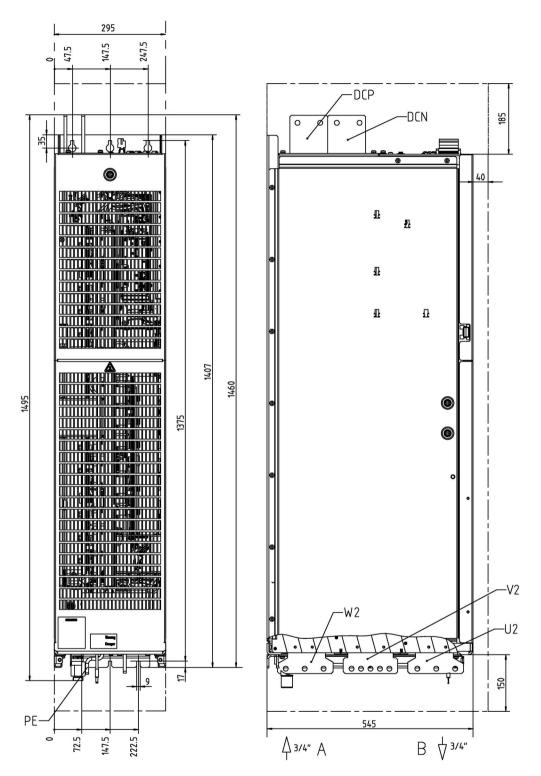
Dimension drawing Motor Module, frame size JXL, article numbers 6SL3325-1TE41-4AS3, 6SL3325-1TG41-6AA3. Front view, side view
